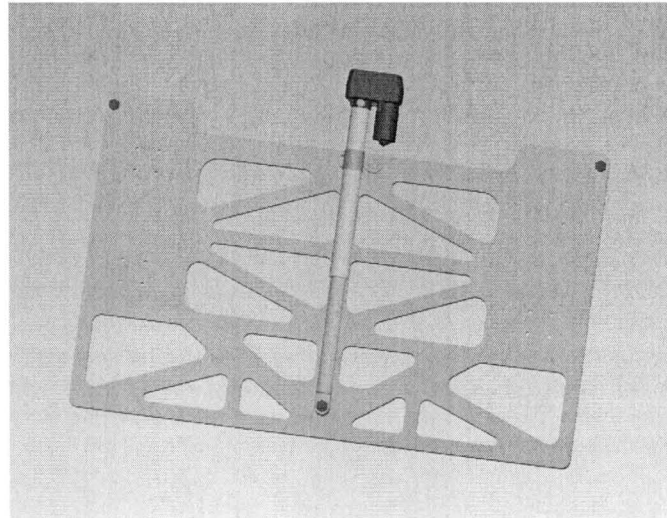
QA Moving Plate + 12VDC Linear Actuator
